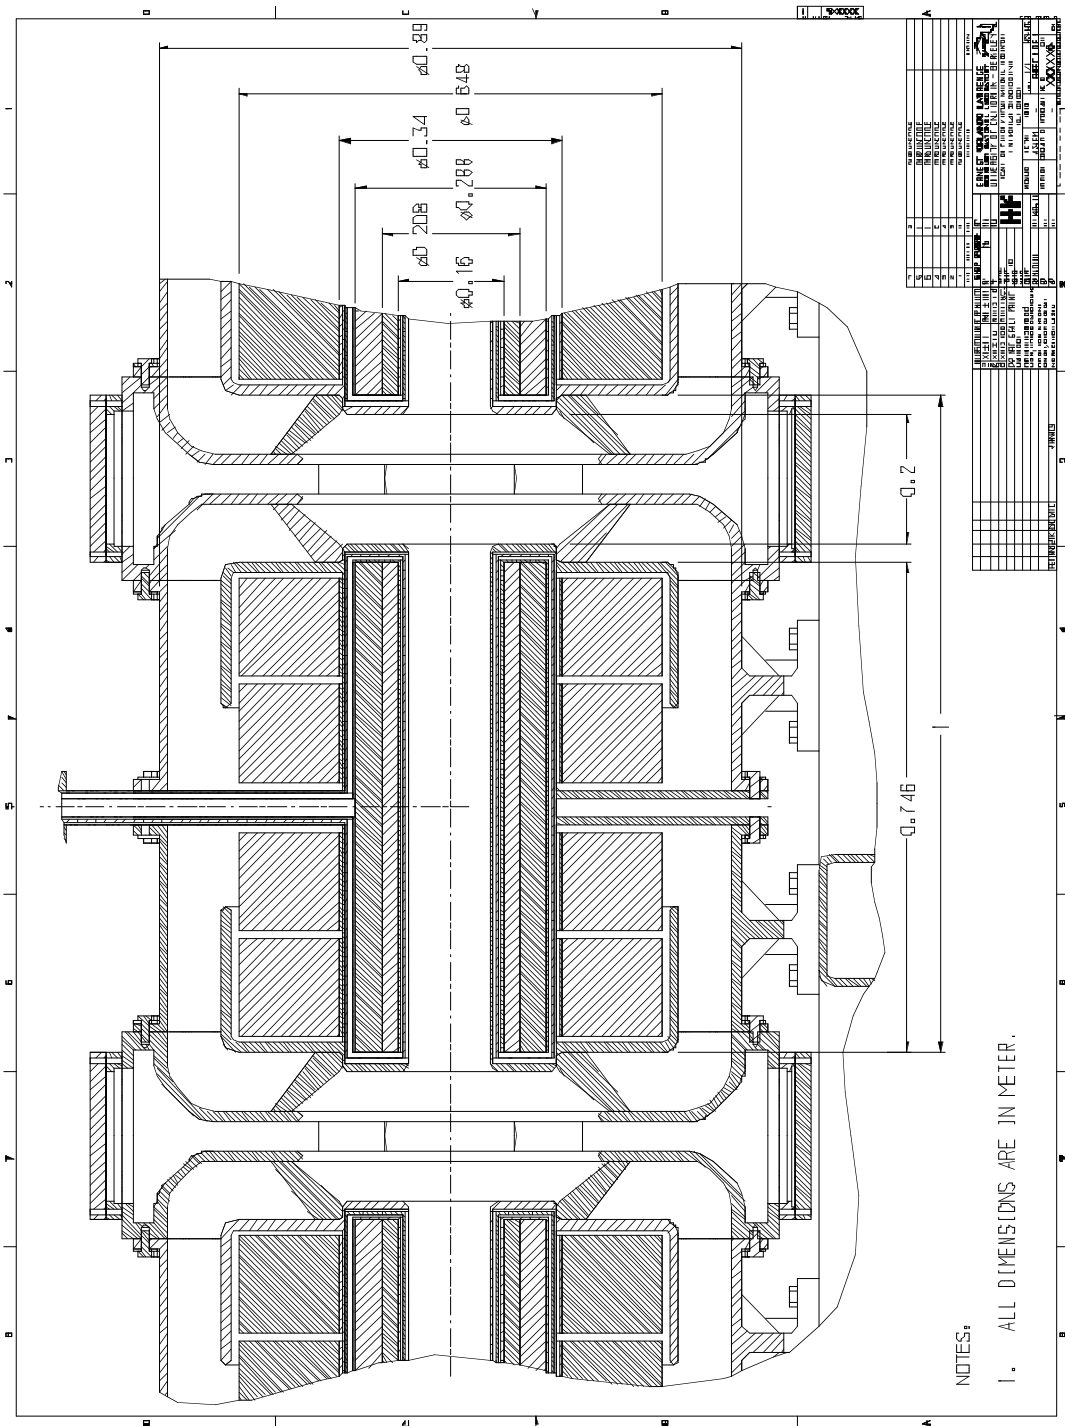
2D drawing showing the main dimension of the driver induction cell.
